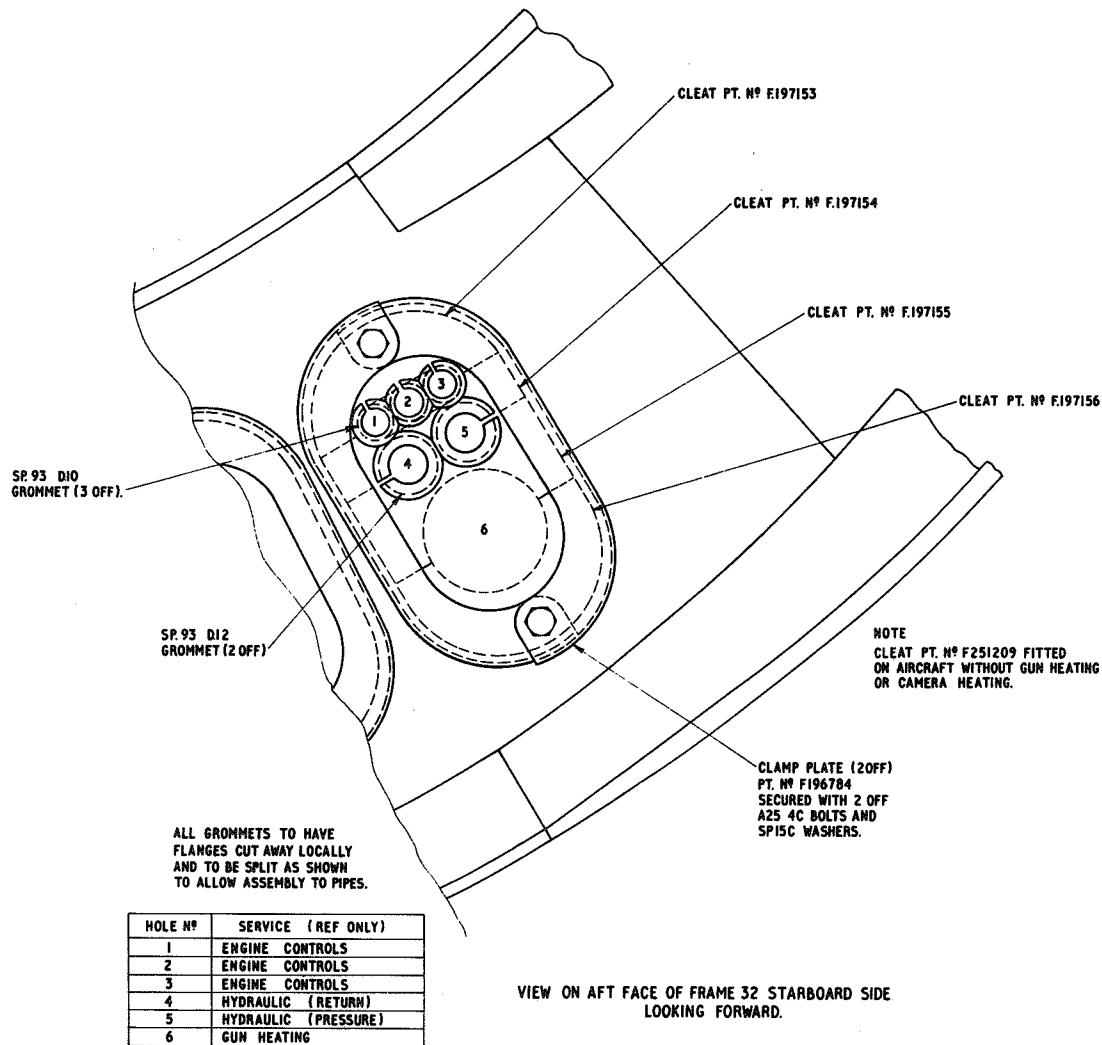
A Assembly of clamp plates and cleats frame 32 (STI/Hunter/395)
